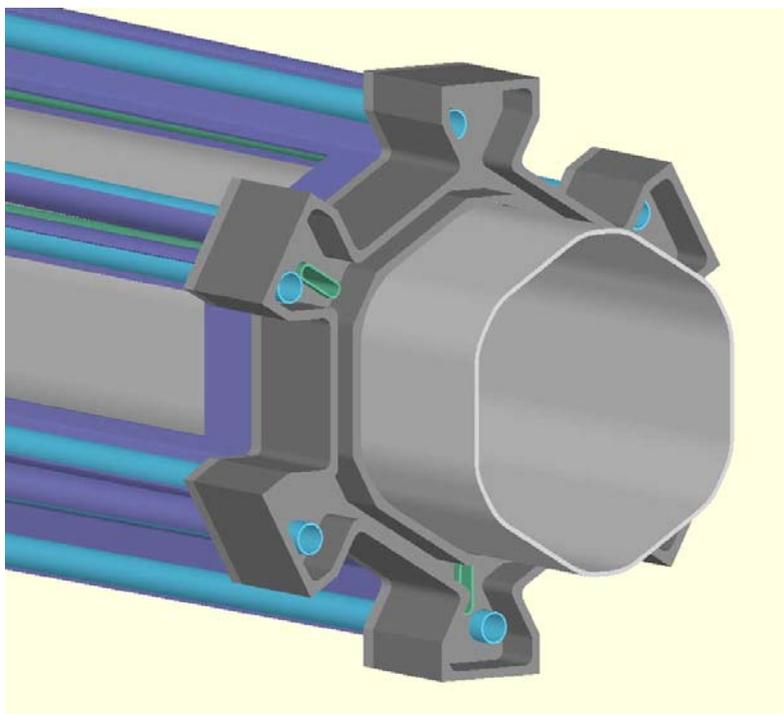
Outer bulkhead showing one of the cooling manifolds exposed.
